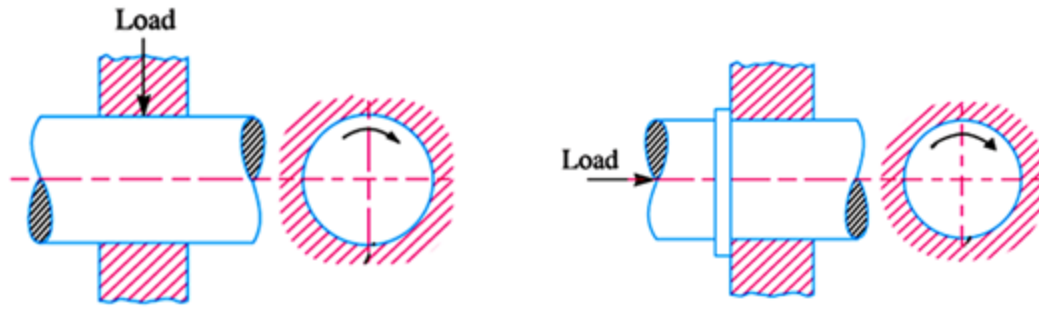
a. Radial Bearing b. Thrust Bearing
